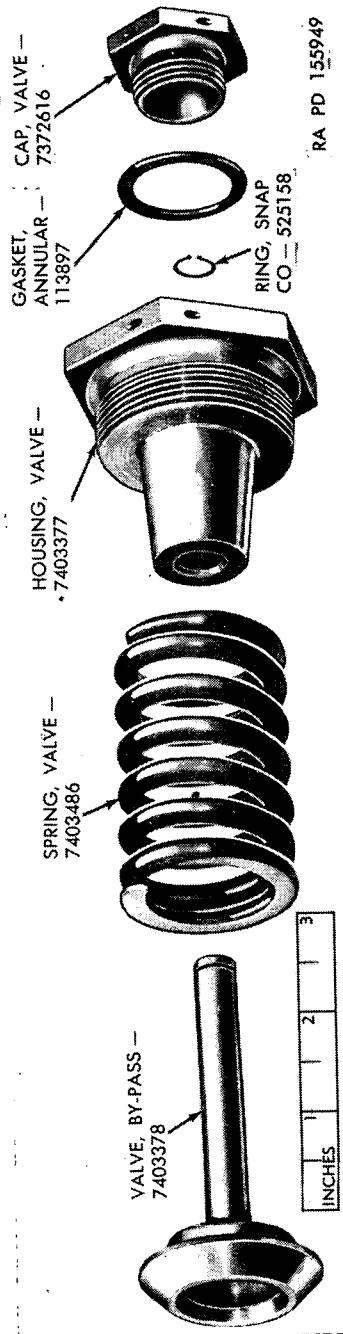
Oil cooler pressure by-pass valve—exploded view.
